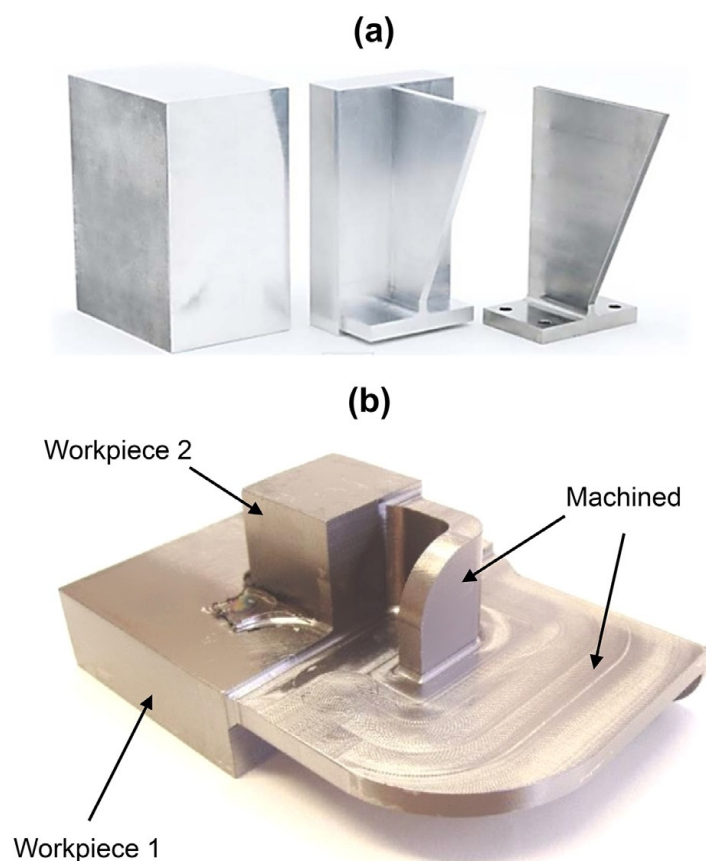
(a) An aerospace component machined from an oversized block of metal, and (b) A Ti-6Al-4V preform fabricated using the LFW process: on the left side – welded structure; on the right – the final machined component (29)
